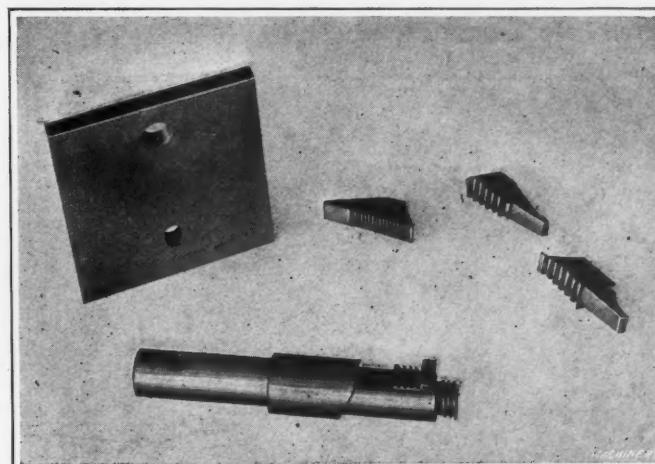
Baseplate of Casting Fixture, Spindle, and Casts or Segments obtained from Ring Gages
